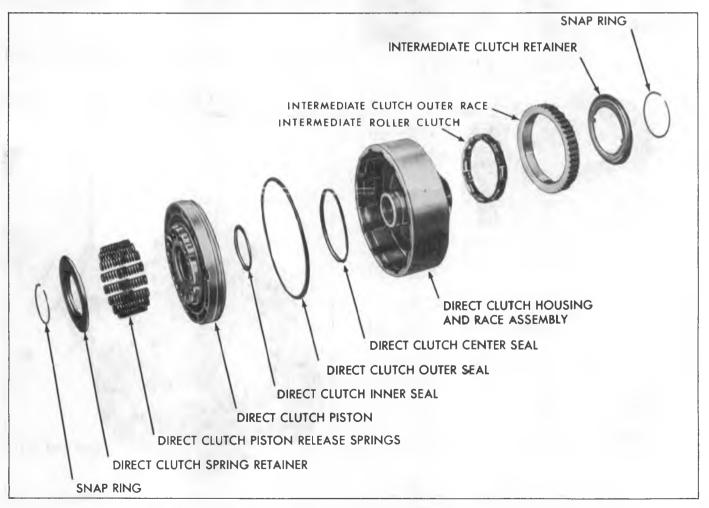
T--Direct Clutch and Intermediate Roller Assembly
